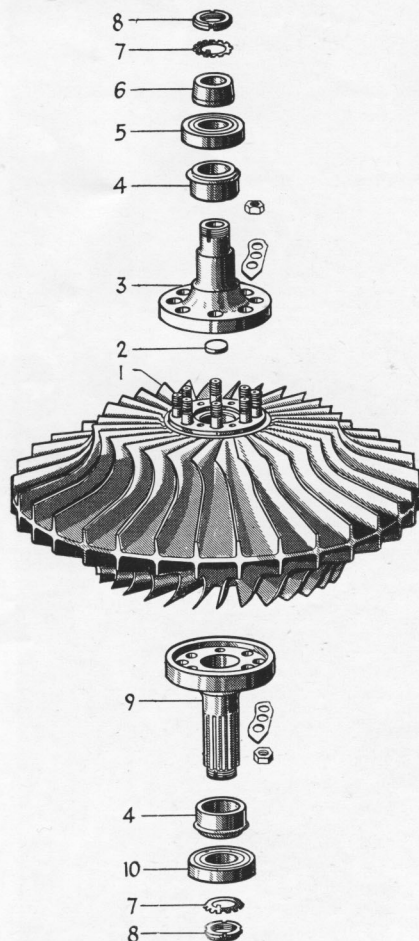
Details of GE I-40 compressor rotor assembly: (1) impeller; (2) plug; (3) front shaft; (4) oil slinger; (5) ball bearing; (6) front bearing spacer; (7) lock washer; (8) lock nut; (9) rear shaft; (10) roller bearing.
